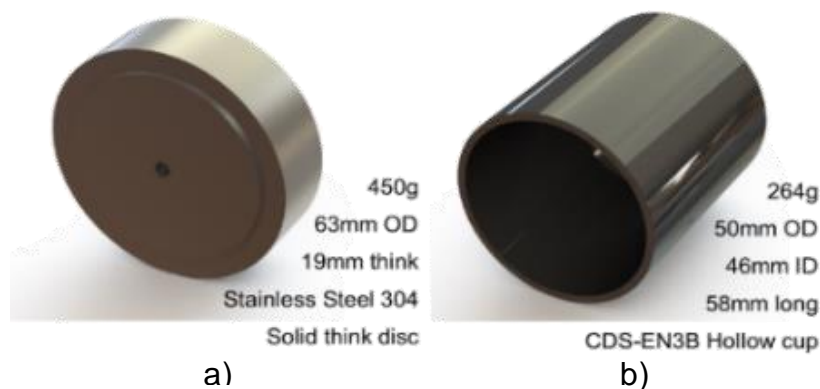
Flywheels for improved energy harvester design: a) Best flywheel from tests results, and b) Optimum design for final flywheel ensuring same inertia as 'a'
